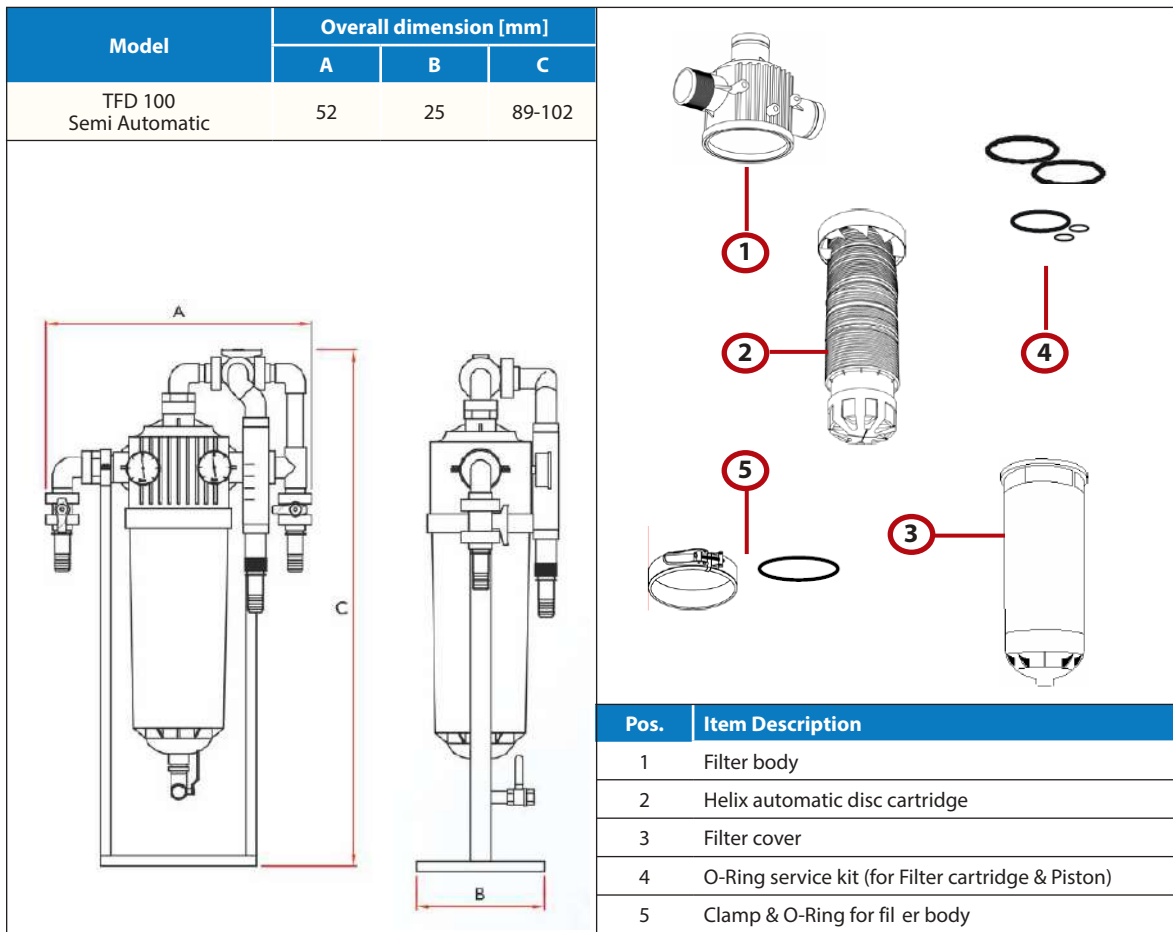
TDF Filter - Overall Dimensions & Spare Parts
